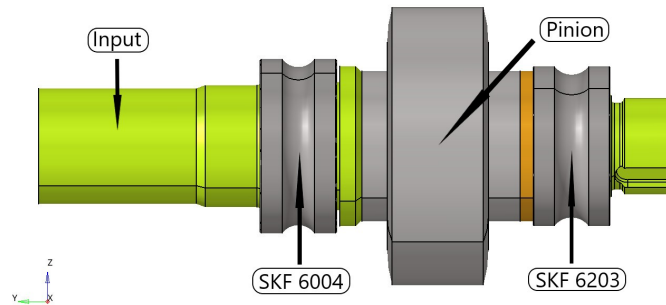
Input Shaft: note the two deep groove ball bearings' races, together with the pinion and the input to which the torque meter is applied.
